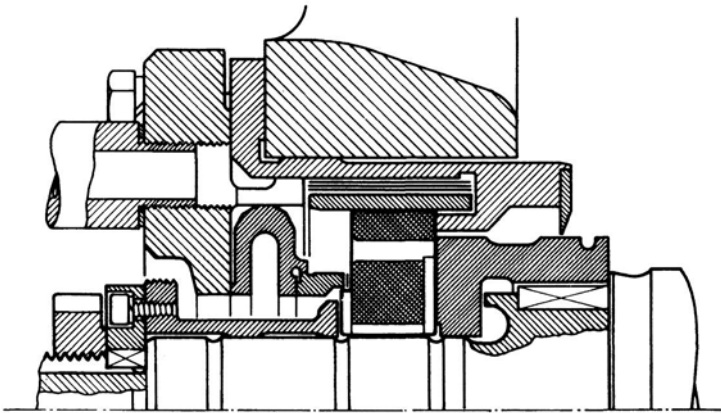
Plain bearing mounting (Brown Boveri)
